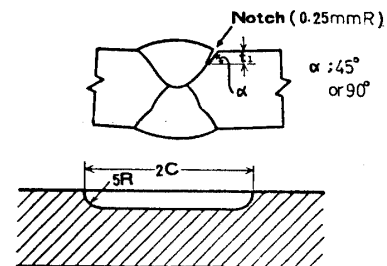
Profile of a test weld with a surface notch (α was 45° in almost all of the specimens)
